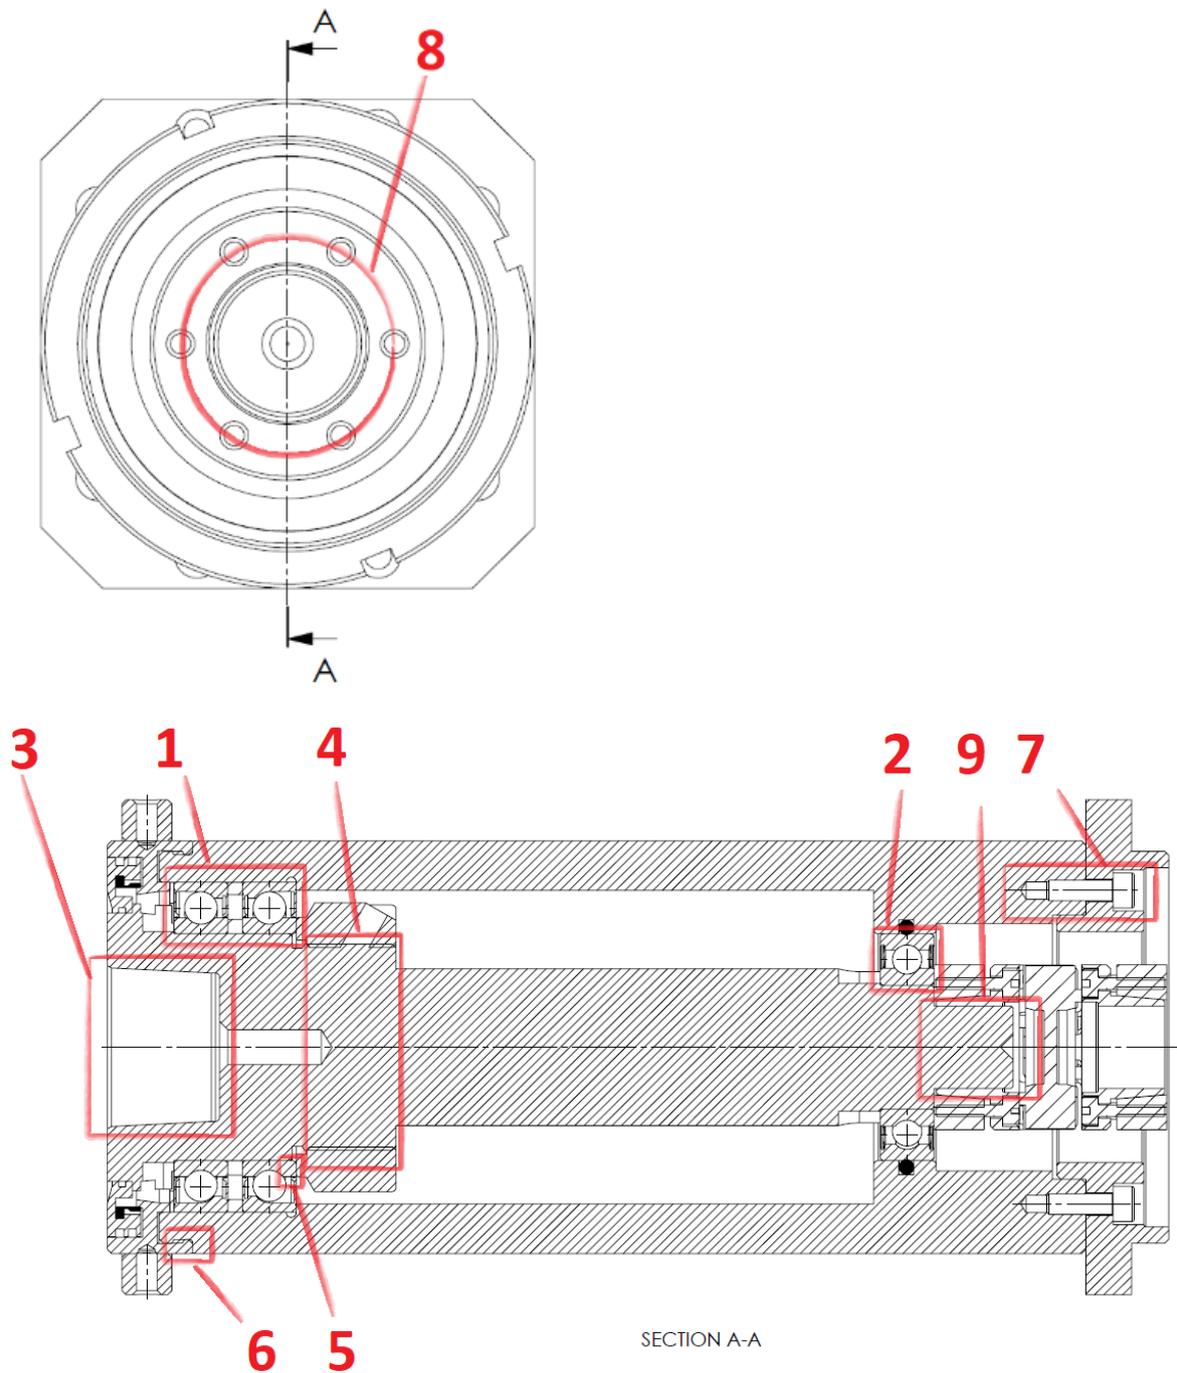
Problematic units of the examined assembly. 1 – Angular contact bearings; 2 – Deep groove ball bearing; 3 – HSK taper surface; 4 – Lock nut; 5, 6 – Linear dimensional chains; 7, 8 – Flange connections; 9 – Coupling connection
